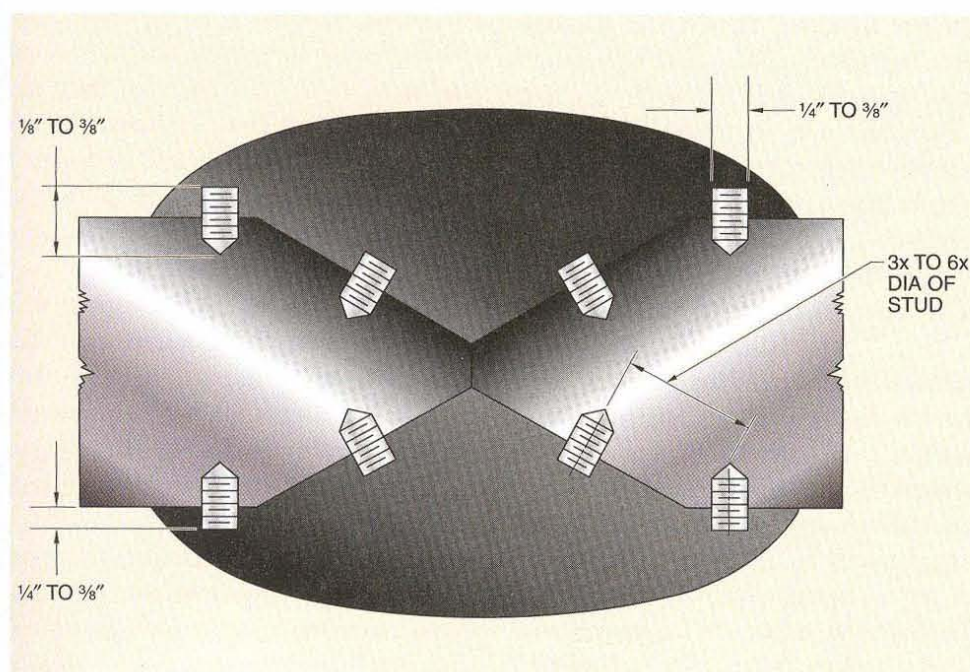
Studding may be used to strengthen the joint when welding castings subjected to heavy stresses.
